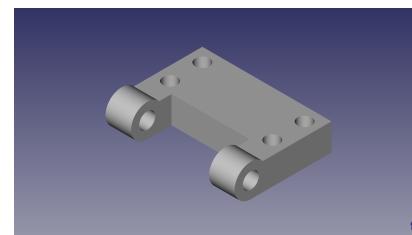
Begonia 3D Printed Spool Hinge Render
